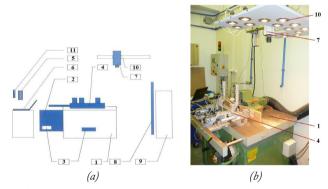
Test stand: 1) moulding machine;2) machine control panel; 3) encoder with display; 4) unit for loading, pressing, and feeding of samples during their milling; 5) manipulator of the unit; 6) recording computer;7) high speed camera; 8) bumper plate; 9) chip and dust extraction; 10) lighting; 11) camera trigger.
